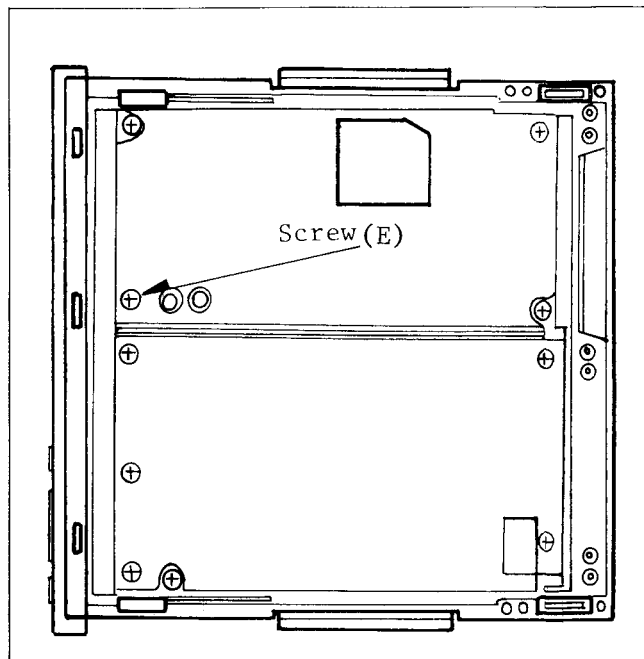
Opening of PCBs (Bottom, Front, Potentiometer)-(1)
